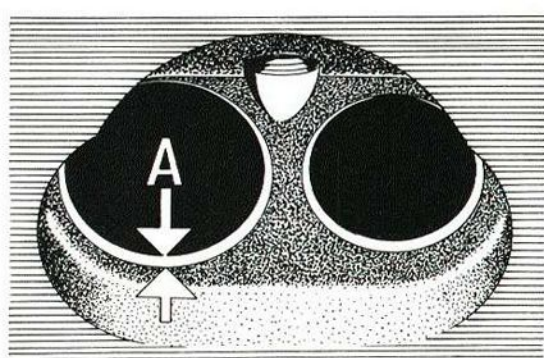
Valve seat width  $A=2$  mm (0.08")
